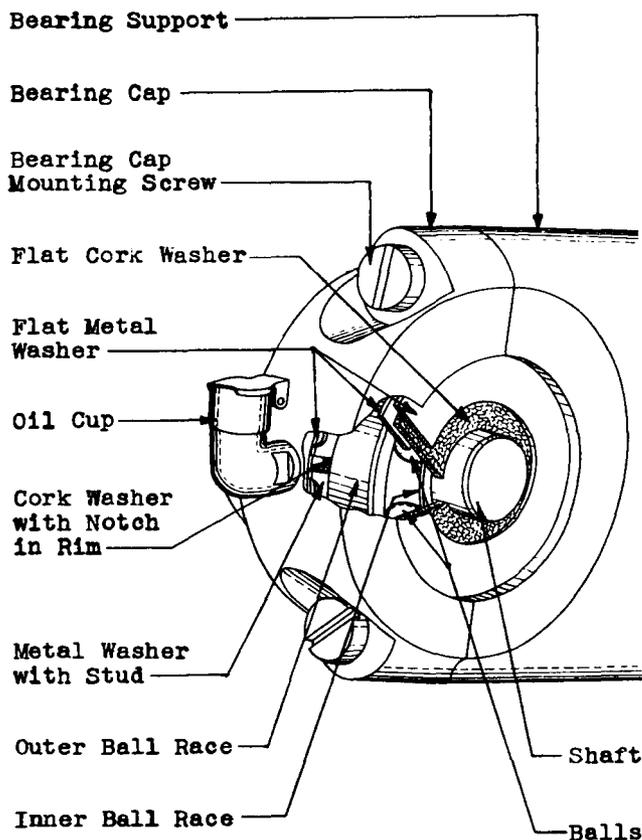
Bearing Assembly at Right-Hand End of Shaft
